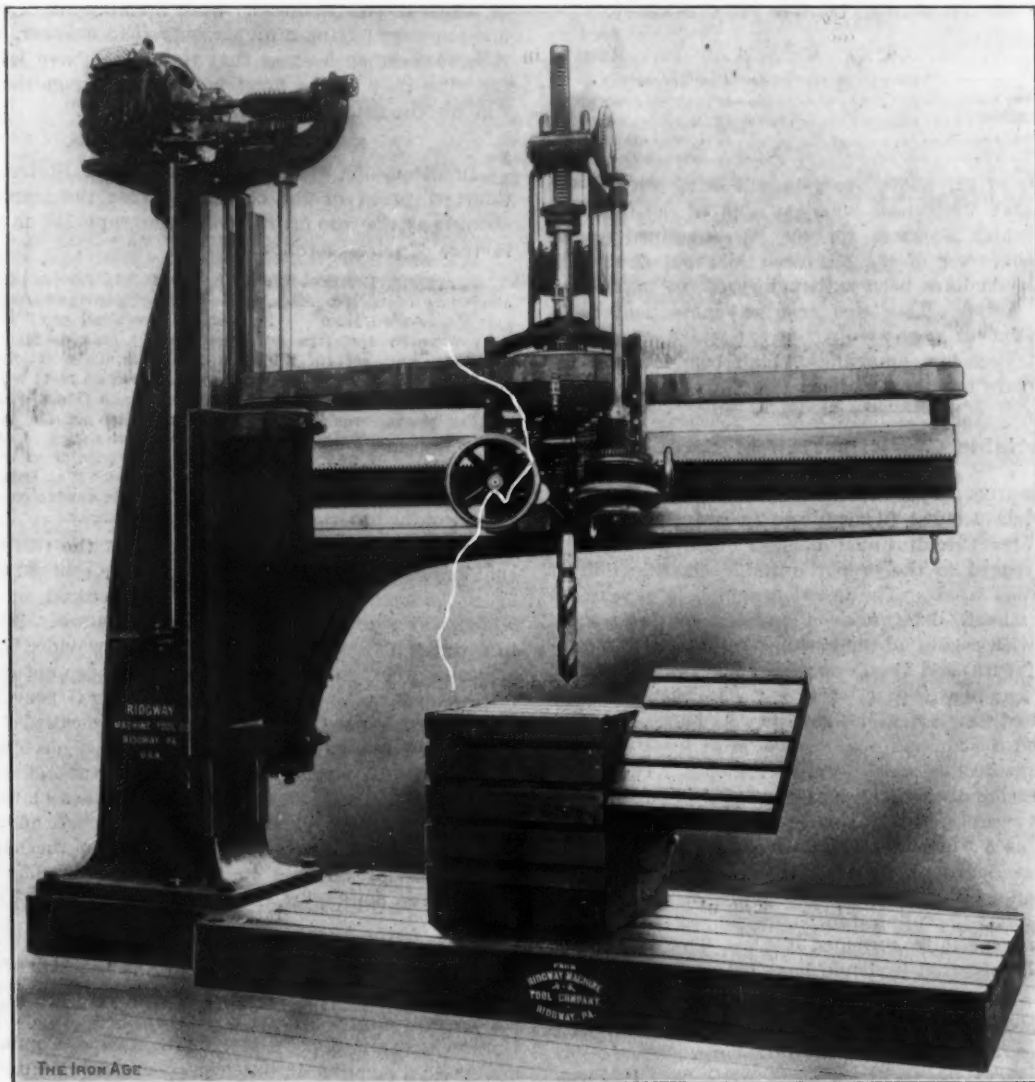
New 8-Foot Radial Drill, Built by the Ridgway Machine Tool Company, Ridgway, Pa.
